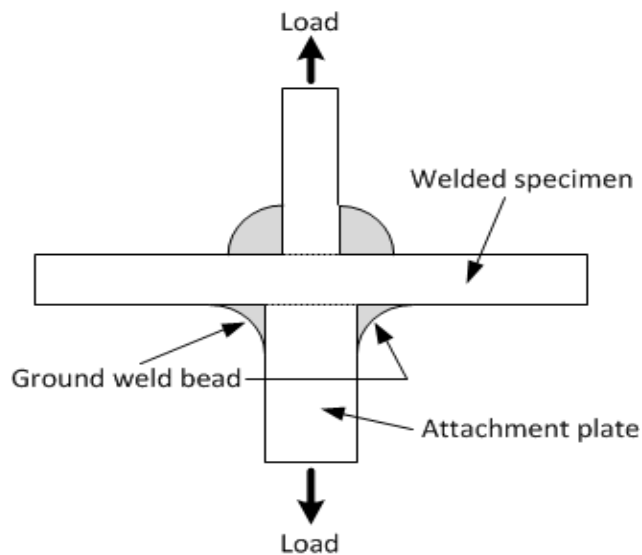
Attachment plate to welded specimen for tensile test
